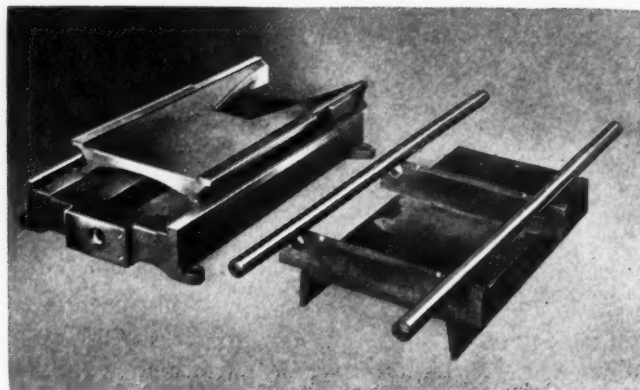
The Five Pieces of Steel Shown at the Right Replace the Two Castings at the Left in the Manufacture of a Saw Carriage
